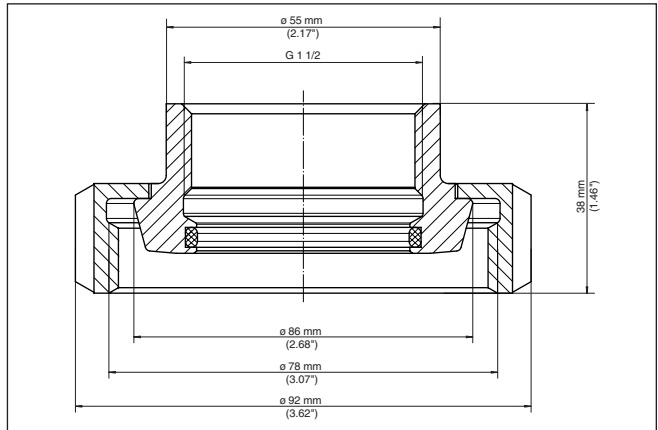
Dimensions of threaded adapter G1½ (DIN 3852-X) on slotted nut DN 50 (DIN 11851) PN 16
